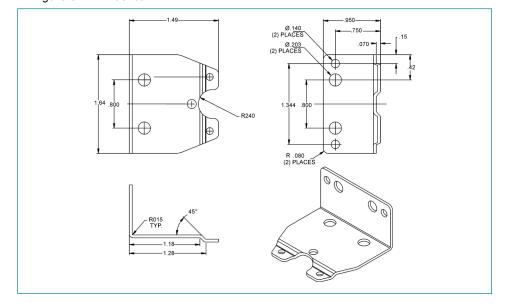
Dimensions: NS2 Switch with integral connectors and mounting feet.
